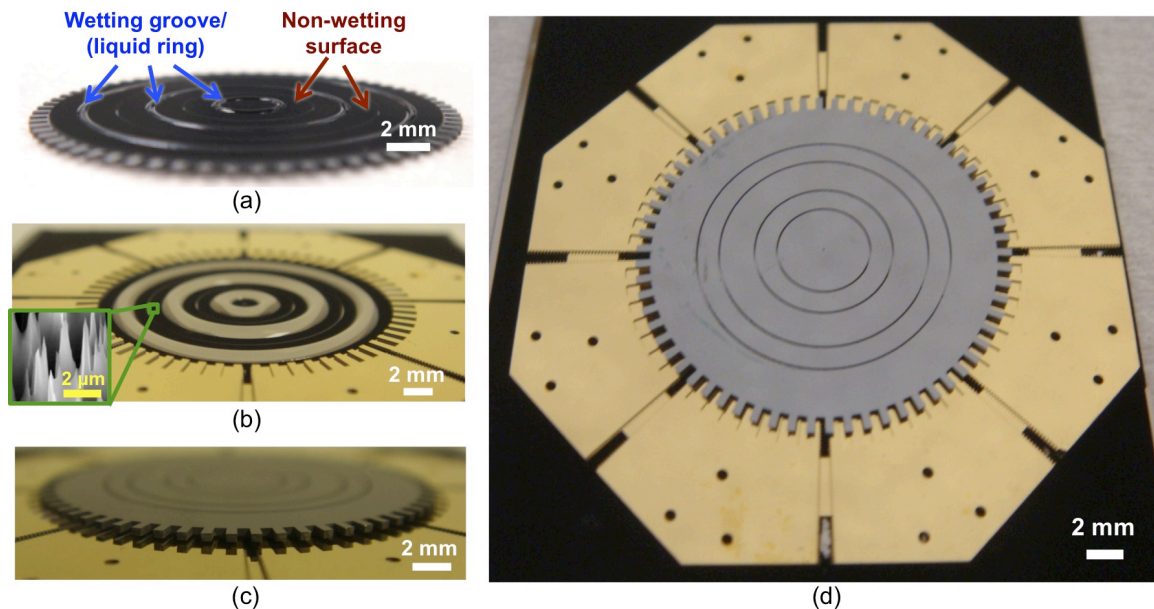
Fabricated rotary stage and assembly. (a) Rotor with dispensed ionic liquid rings. (b) Substrate and bonded 8 stators with dispensed ionic liquid rings; Inset shows the SEM image of the black silicon structures. (c-d) Rotor flipped over and assembled to the substrate by liquid rings with the gap controlled by liquid volume.
